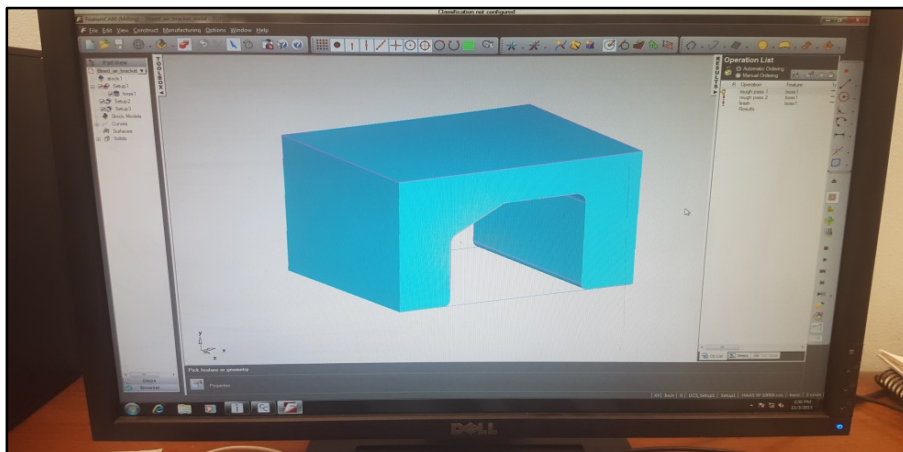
3D Printed Mold Form, Bleed Air Duct Bracket
